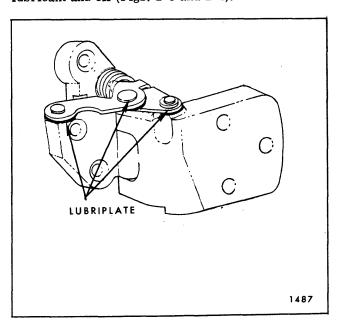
Rear Door Hinge Hold-Open Assembly
